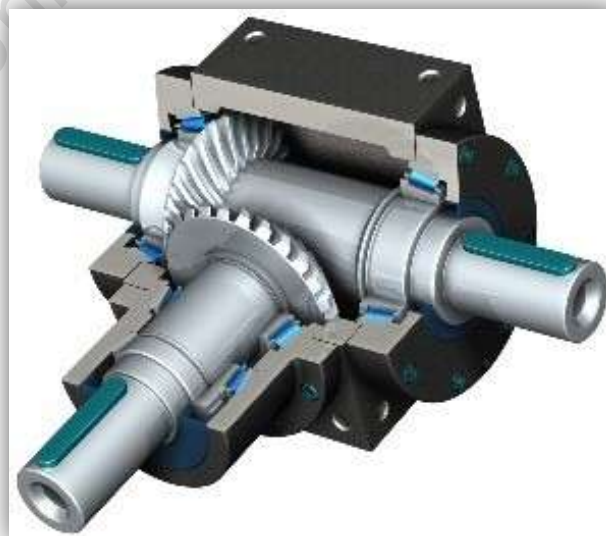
Cutaway of Bevel Gearbox Showing Gear and Bearing Arrangement [32]
